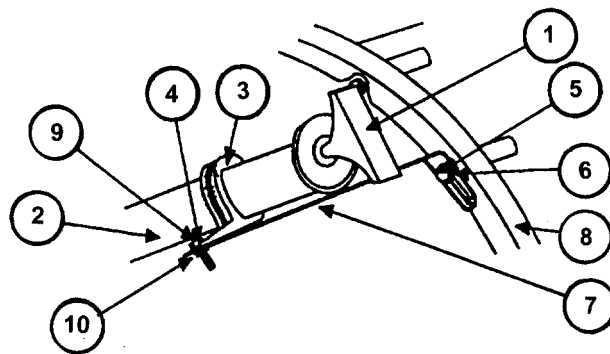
Oil Fill Tube Assembly and Oil Level Indicator (Dipstick). (Repeated).
